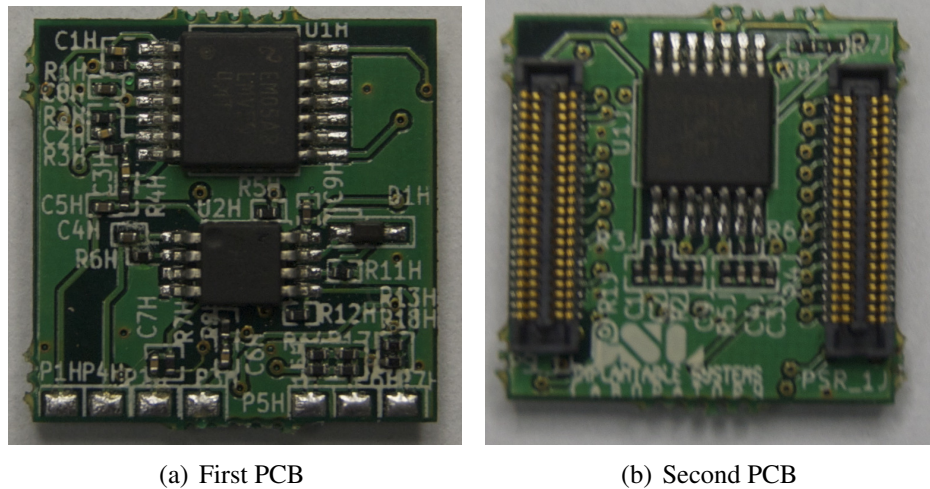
Interface Module Lock-In method – prototype 2 PCB layout. (a) first PCB (b) second PCB.
